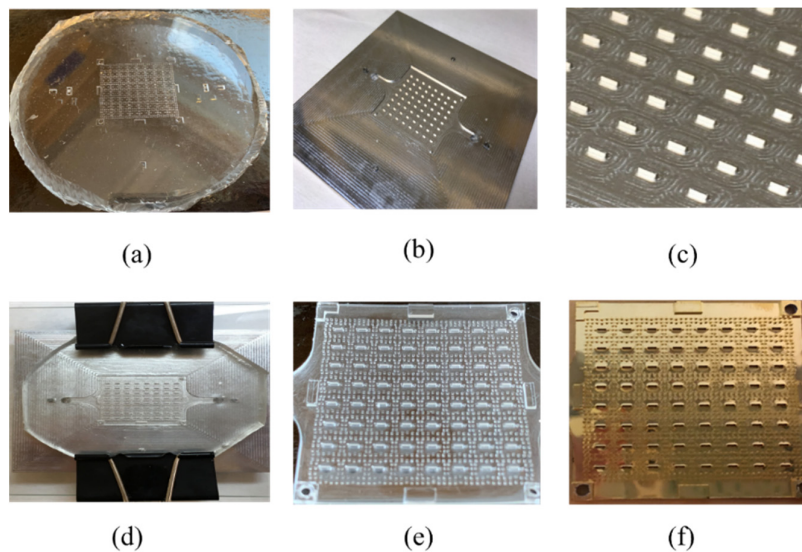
Injection molding steps for the cavity layer. (a) PDMS mold for the cavity layer, (b) aluminum (Al) mold, (c) closed image of the milled Al piece showing the pins to create the cavity opening after injection molding, (d) PDMS mold on top of the aluminum mold, ready for injection molding, (e) cavity layer made of OSTEMER after UV exposure and heat cure, (f) cavity layer after conductive layer deposition.
